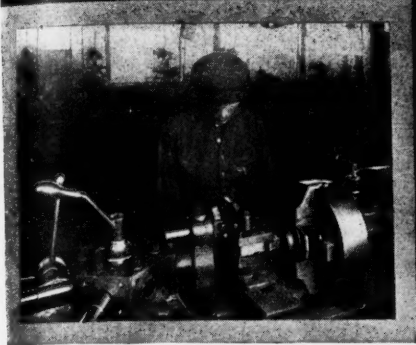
Set-up for grinding Eccentric Hole in Collet
